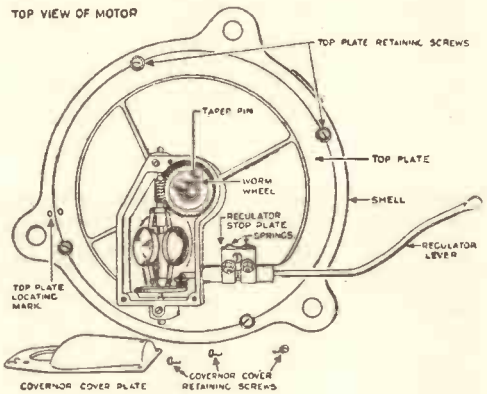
TOP VIEW OF THE 521 D.C. MOTOR.
